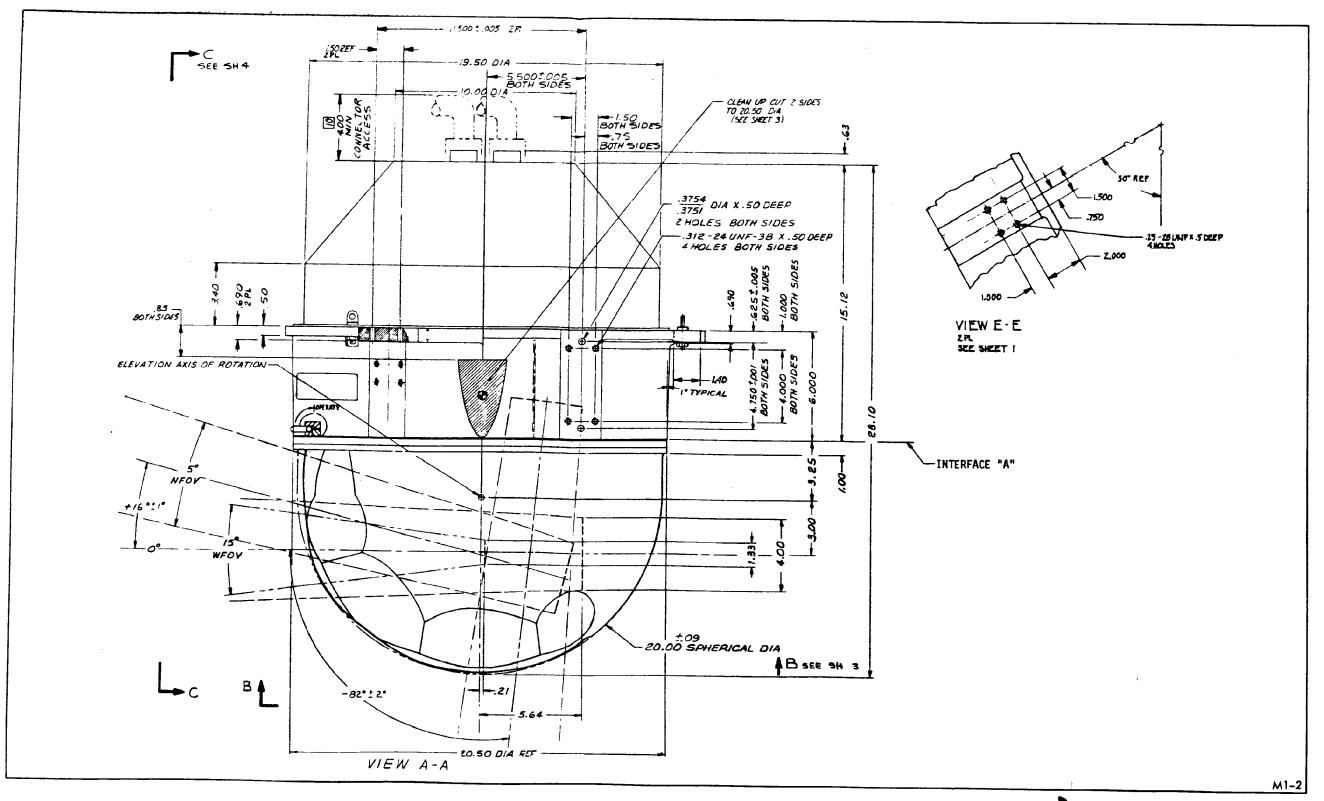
Receiver converter, outline drawing. (sheet 2 of 5)
